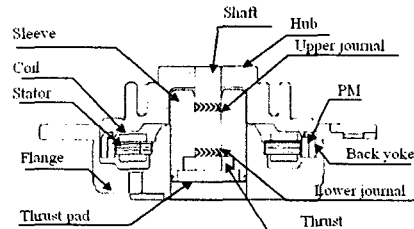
Structure of 3.5" HDD spindle motor using FDB
